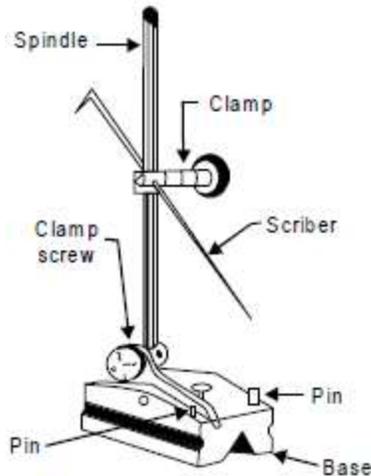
illustrate the surface gauge which is a principal marking tool used generally in the fitting and the machine shops. It is made in various forms and sizes. It consists of a cast iron sliding base fitted with a vertical steel rod. The scriber or marker is positioned or set into an adjustable device using a knurled nut at one end. The scriber can be loosened or tightened by means of the nut. The marker is used to set it at any desired inclination, moved to and fro inside the hole accommodating it or adjust its height along the vertical pillar. It is commonly used in conjunction with either a surface plate or marking table. It is used for locating centres of round rod held in V- block, describing straight lines on work held firmly in its position by means of a suitable device like angle plate and also in drawing a number of lines parallel to a true surface. This device is a very simple form of surface gauge and it is largely being replaced by a more accurate instrument called universal surface gauge.
